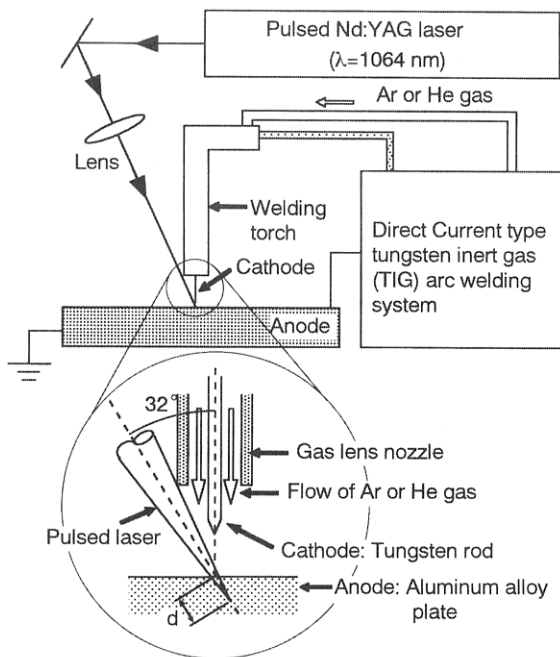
A schematic diagram of the experimental setup to trigger arc discharge. A direct current-type TIG arc welding system and a pulsed Nd:YAG laser were employed. The cathode and anode of this system consisted of a tungsten rod and an Al alloy plate, respectively. The laser was focused onto the Al alloy plate by a 150-mm focal length lens at an incident angle of 32 degrees.
